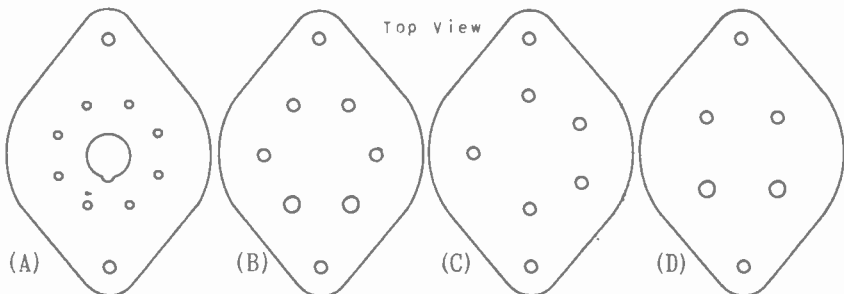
An 8-prong octal socket. A 7-prong wafer socket. A 5-prong wafer socket. A 4-prong wafer socket. These views are all looking down on the top of the sockets.
